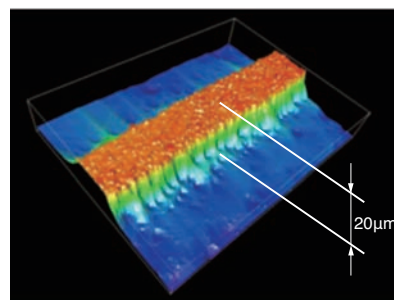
(b) indicates the 3D display of a printed wiring board after etching. A height measurement
